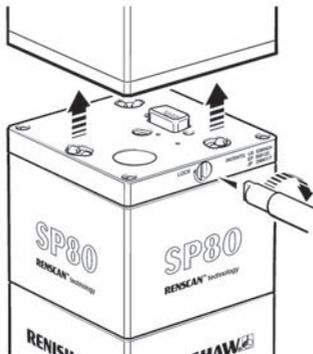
Attaching the SP80 to the quill adaptor plate (KM80 shown)
